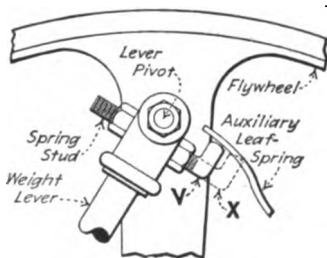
Adjustable spring stud for auxiliary springs of Buckeye governor.
